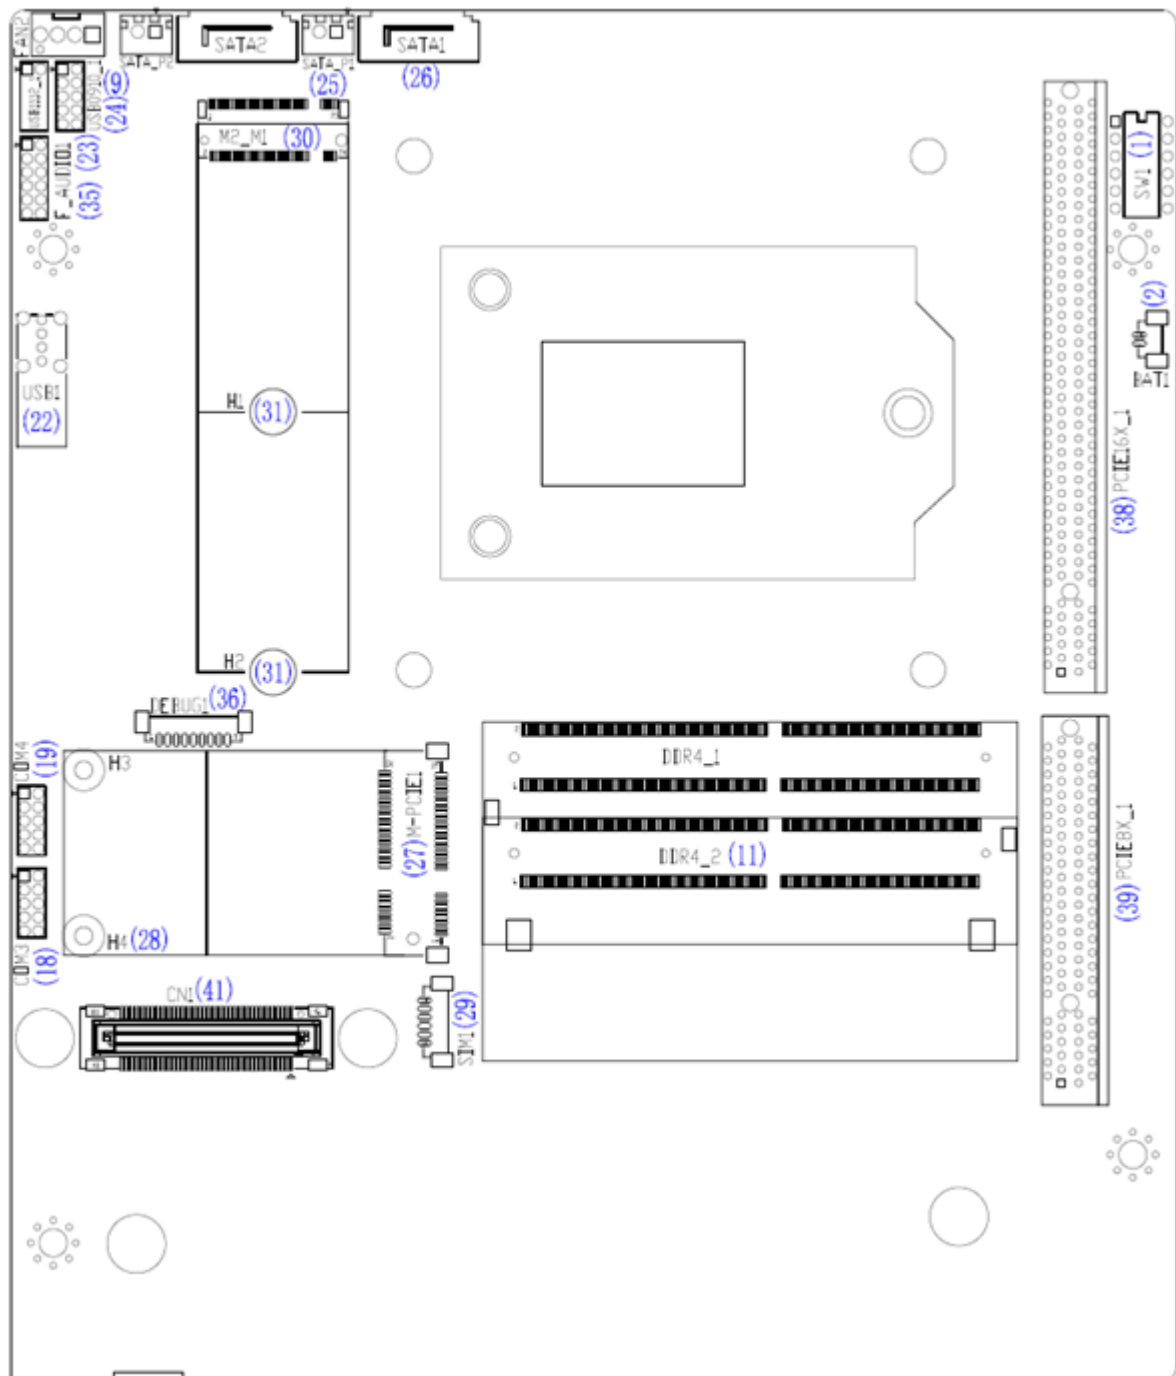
Jumpers and Connectors Location- Board Bottom
